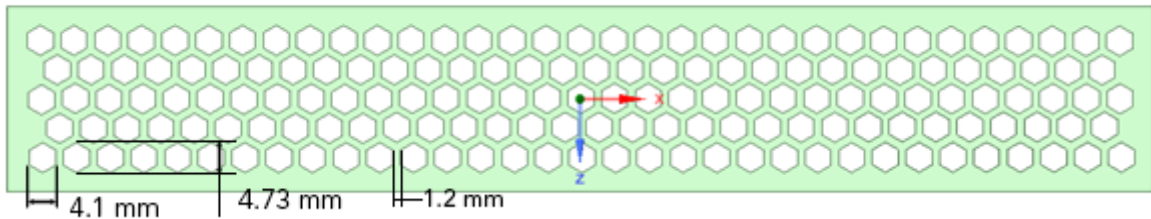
Dimensions and pattern for the hexagonal shaped inlet holes.
